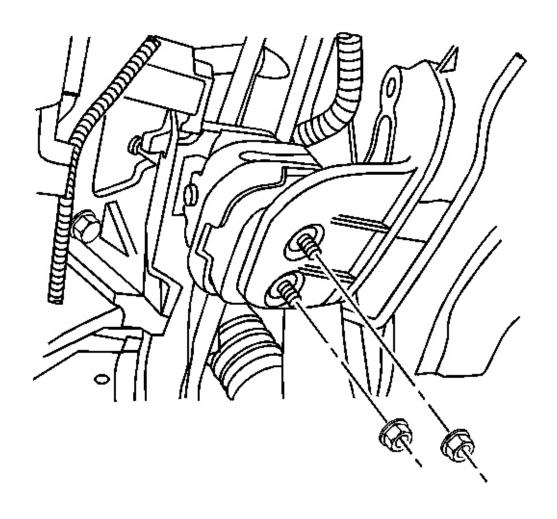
View Of Left Lower Engine Mount Courtesy of GENERAL MOTORS CORP.
